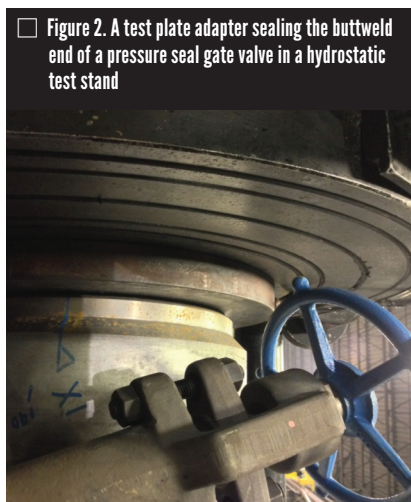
A test plate adapter sealing the butt-weld end of a pressure seal gate valve in a hydrostatic test stand
